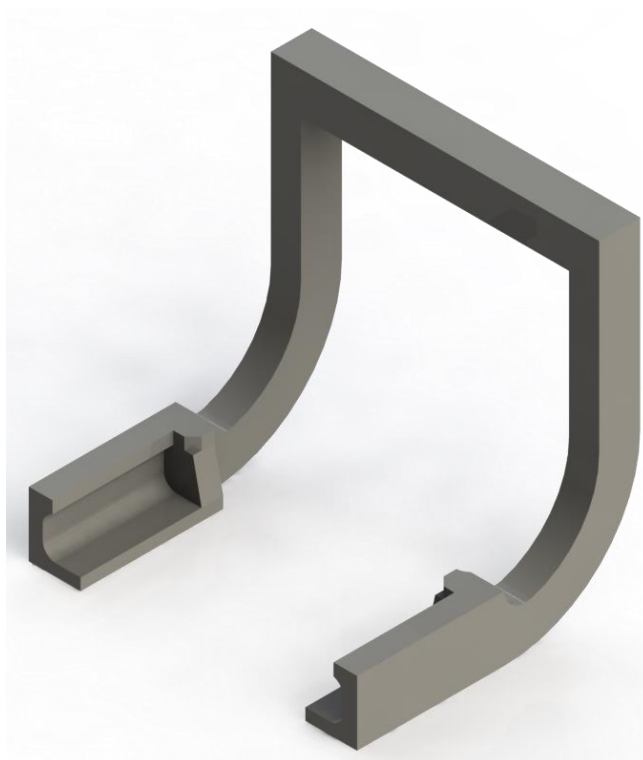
Isometric view of the 3D printed ABS diffusion cell holder
